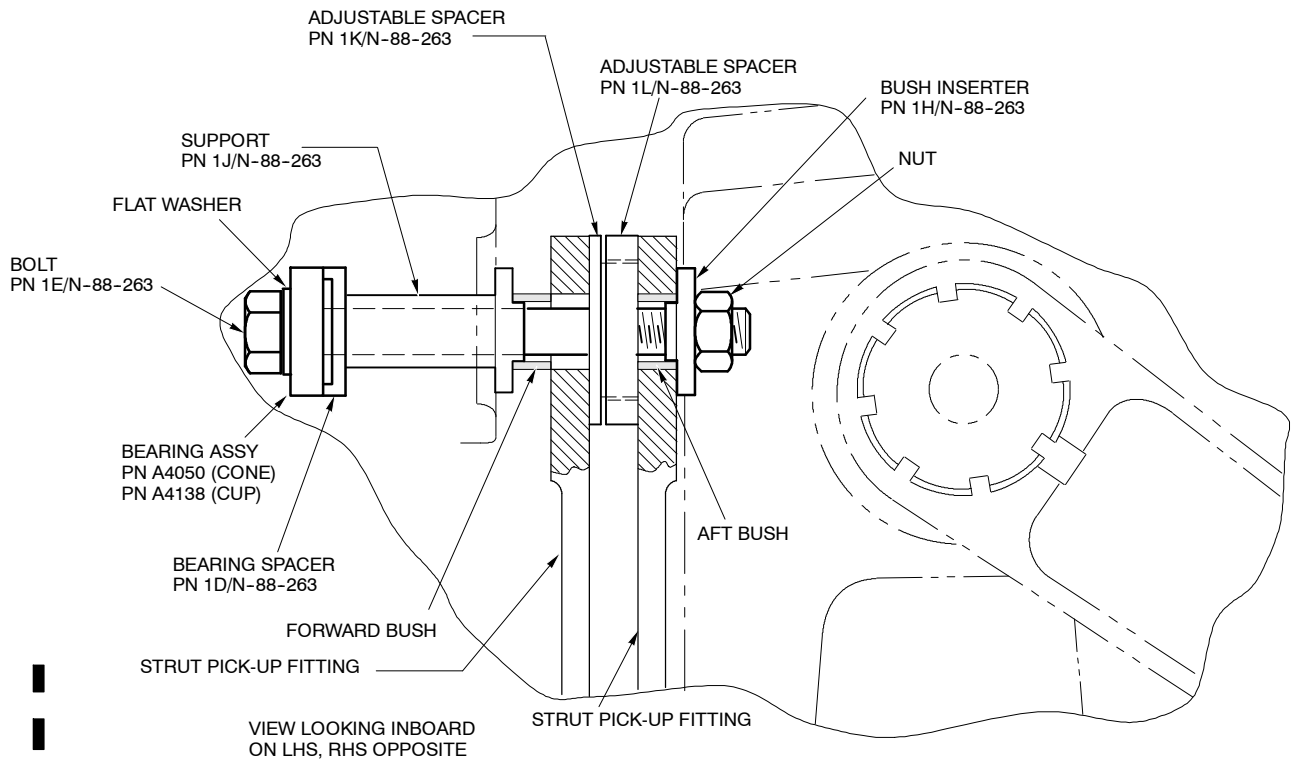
Removal of the Forward and Aft Bushes - Stub Wing Wing Strut Pick-up Fitting
